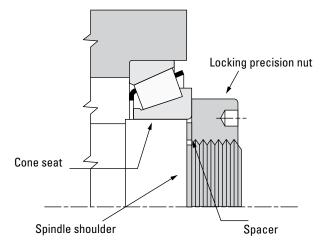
Using ground spacer and spindle shoulder together with a precision nut for improved accuracy.
